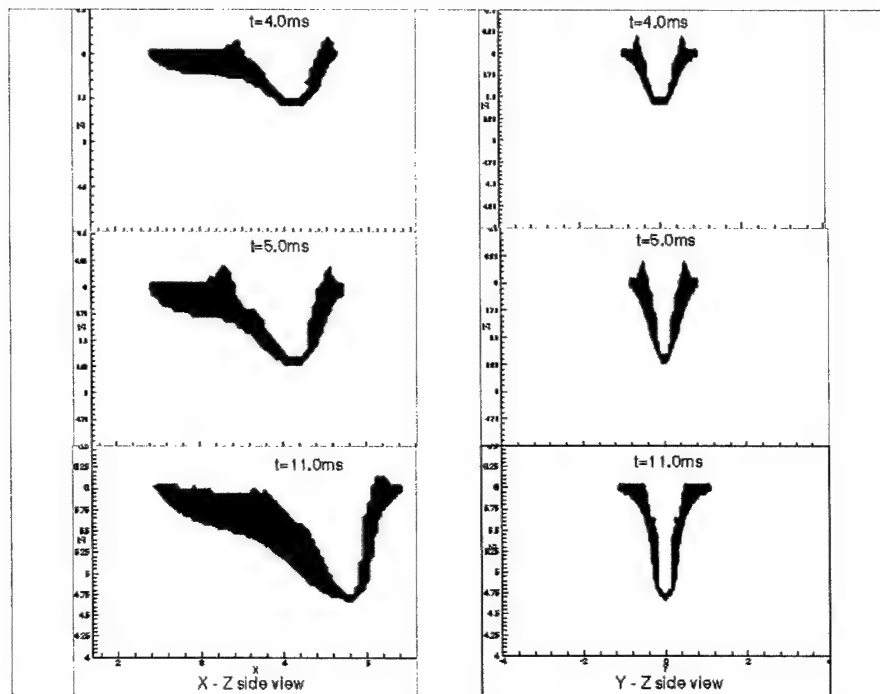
X-Z plan and Y-Z plan views of the weld pool shapes.
